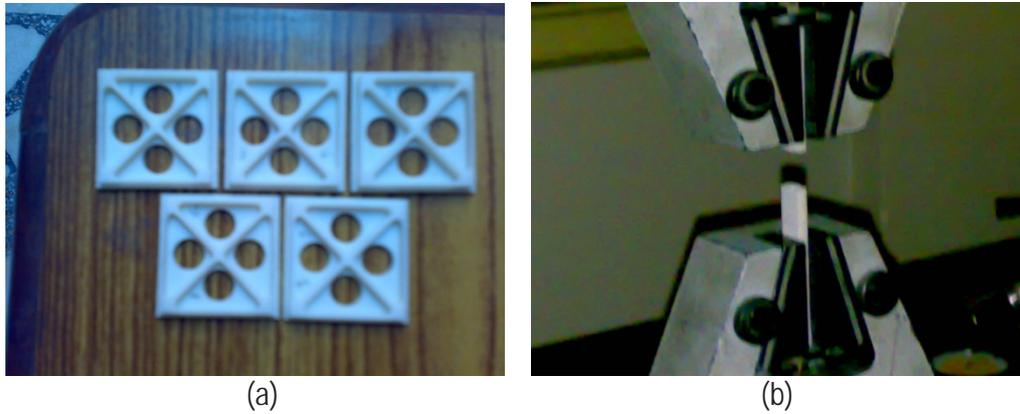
(a) Photograph of different specimens to measure S%, (b) Photograph of universal testing machine with sample
